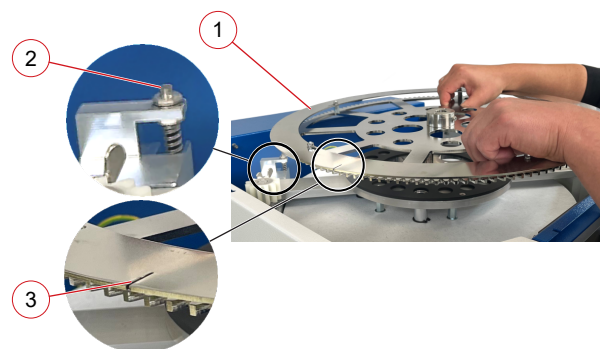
Ground cable, grub screw on the positioning wheel
